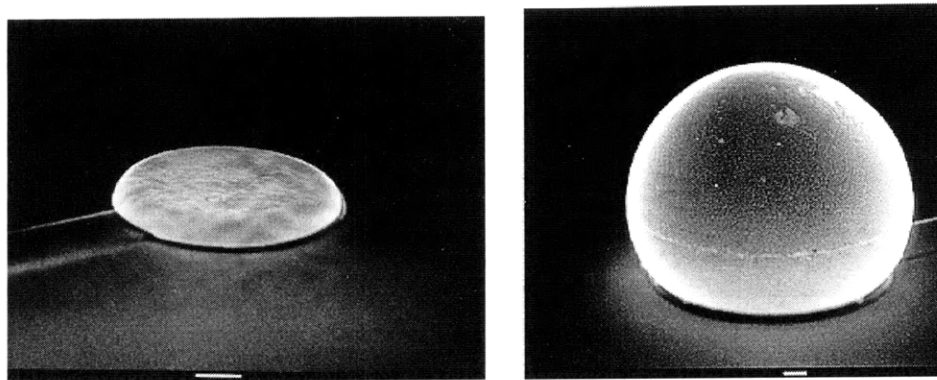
Coining process enables smooth, consistent surface. Right: Original Solder Bump. Left: Coined Solder Bump.
